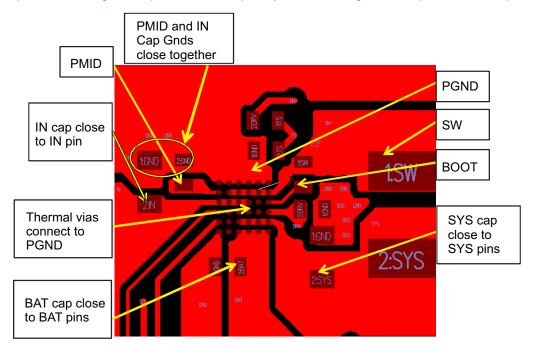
Recommended bg24188 PCB Layout for WCSP Package
